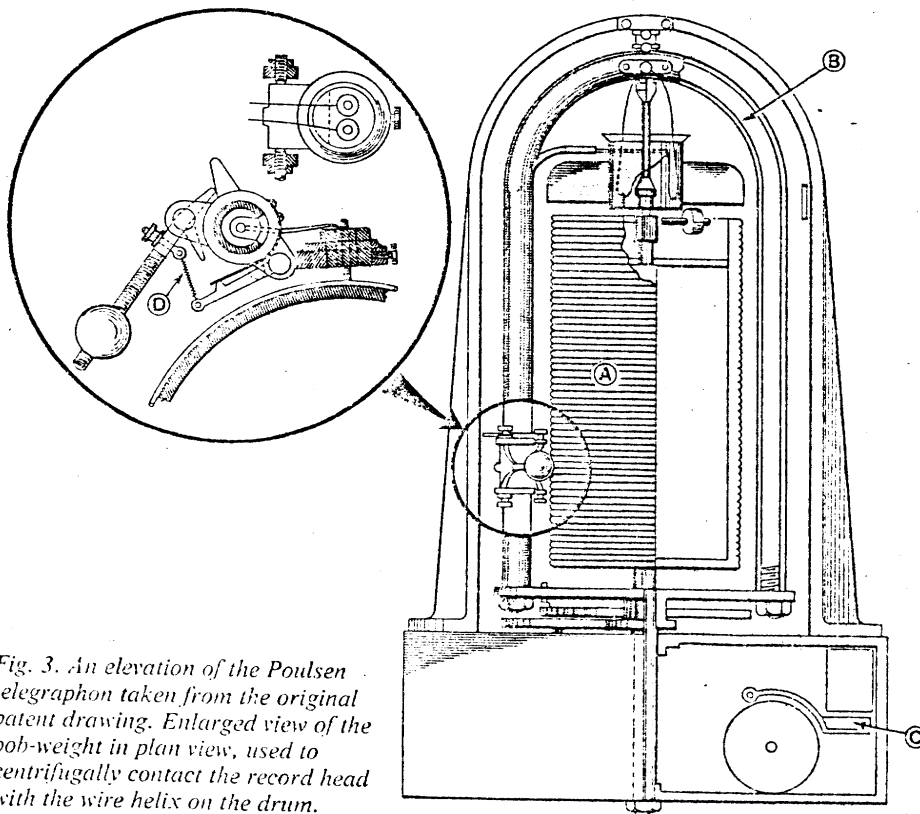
An elevation of the Poulsen telegraphon taken from the original patent drawing. Enlarged view of the bob-weight in plan view, used to centrifugally contact the record head with the wire helix on the drum.
